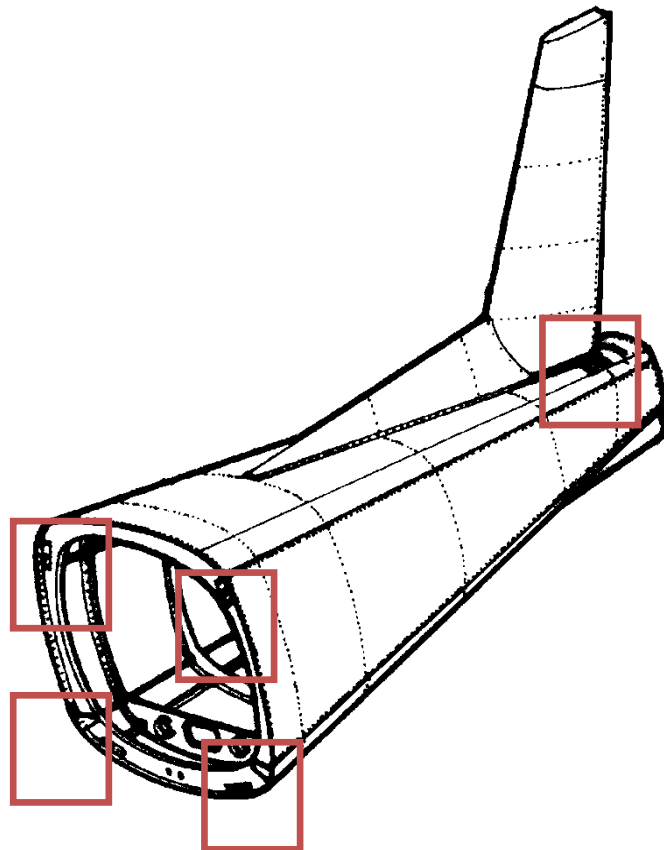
Fuselage rear part of the Z 242L aircraft with market areas for visual inspection check
